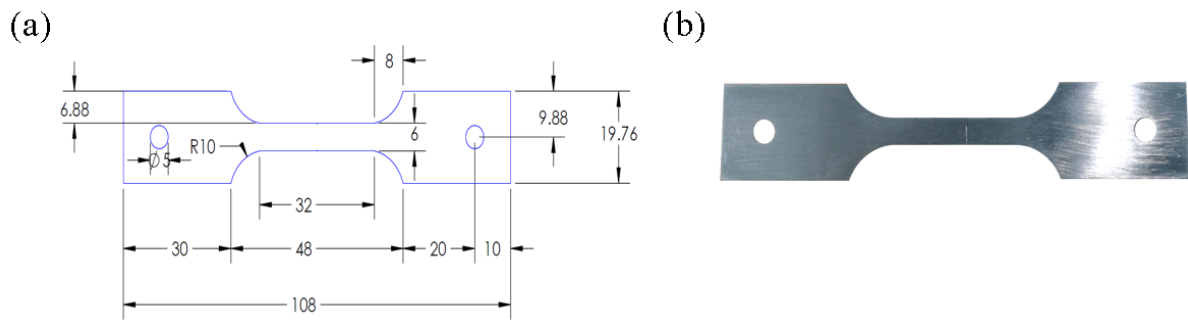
(a) Geometry design (in mm) of specimen for uniaxial tensile test (b) Photo of a sample for uniaxial tensile tests
